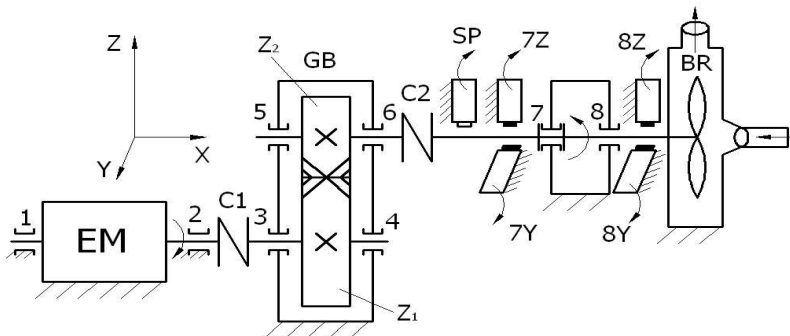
The air blower machine scheme with proximity probes location: 1, 2 – journal bearings of EM; 3-6 – journal bearings of GB ($u = 0.477, z_2 = 43, z_1 = 90$); 7, 8 – tilting-pad journal bearings of BR; C1, C2 – flexible couplings; 7Y, 7Z and 8Y, 8Z – proximity probes fixed at the 7th and 8th bearings, SP – keyphasor transducer
